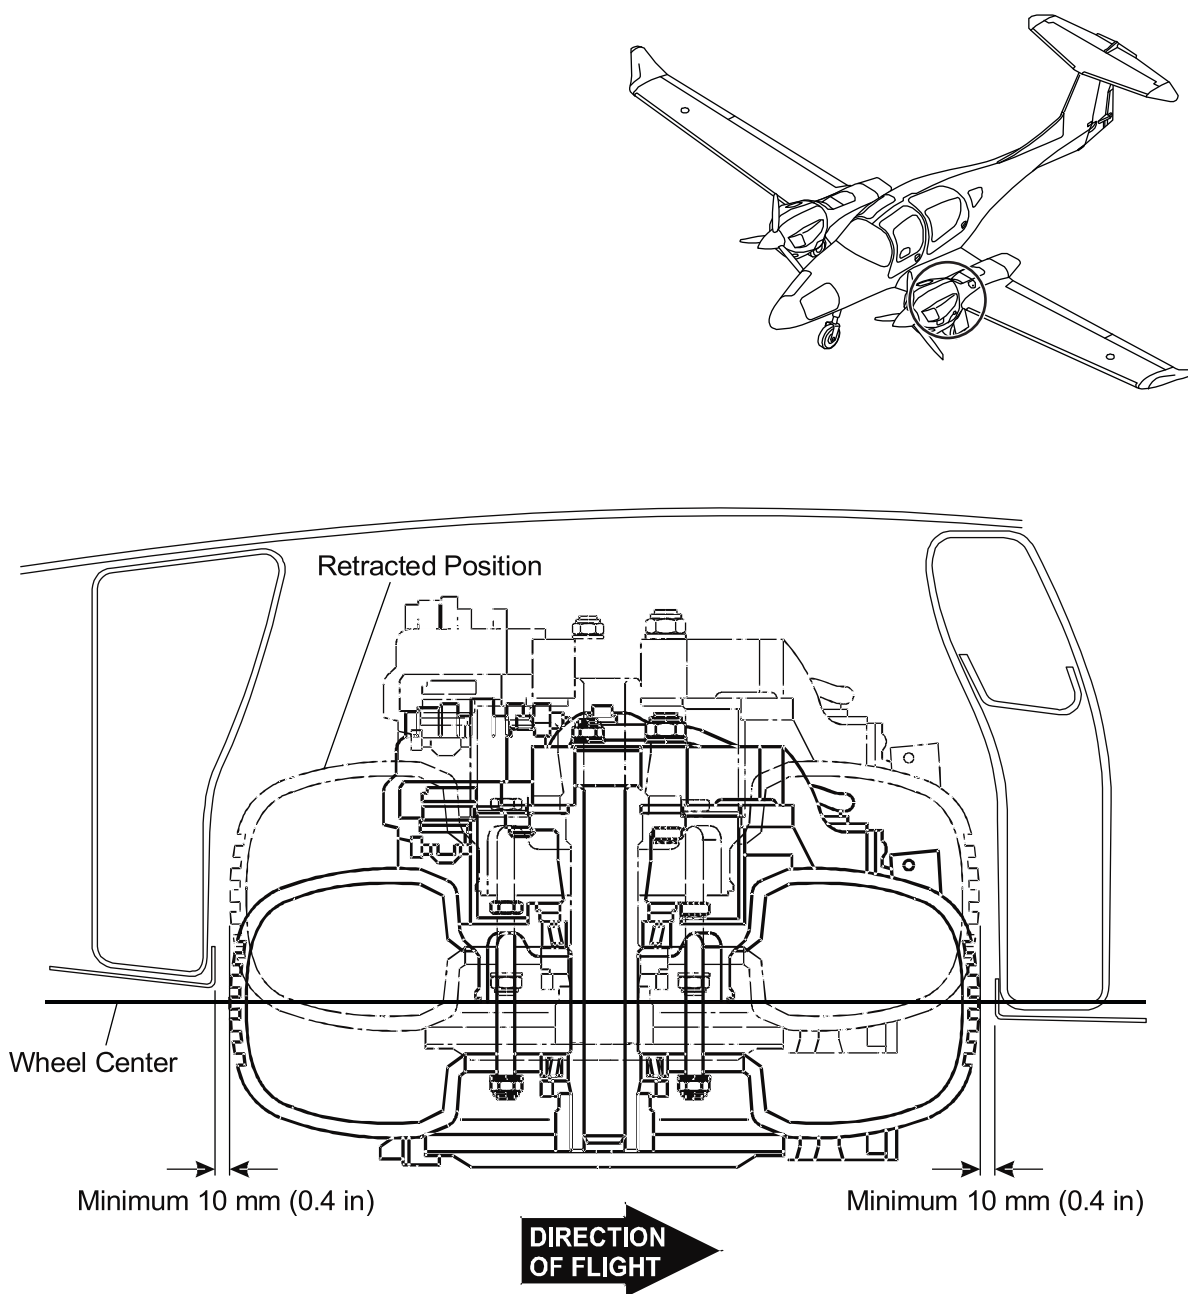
Main Landing Gear - Tire Clearance Measurement
